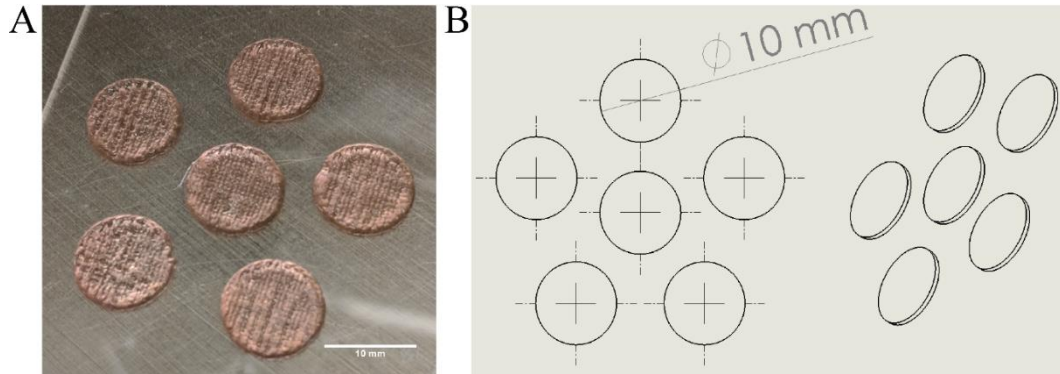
Printed Patches. A) Printed patches of 10 mm diameter and 0.6 mm height. Patches are printed uniformly from patch to patch, and the grid infill pattern can be seen. Patches are pink post-printing due to the inclusion of photoinitiator Eosin Y and become clear post-polymerization. B) CAD model sketch used for patch printing.
